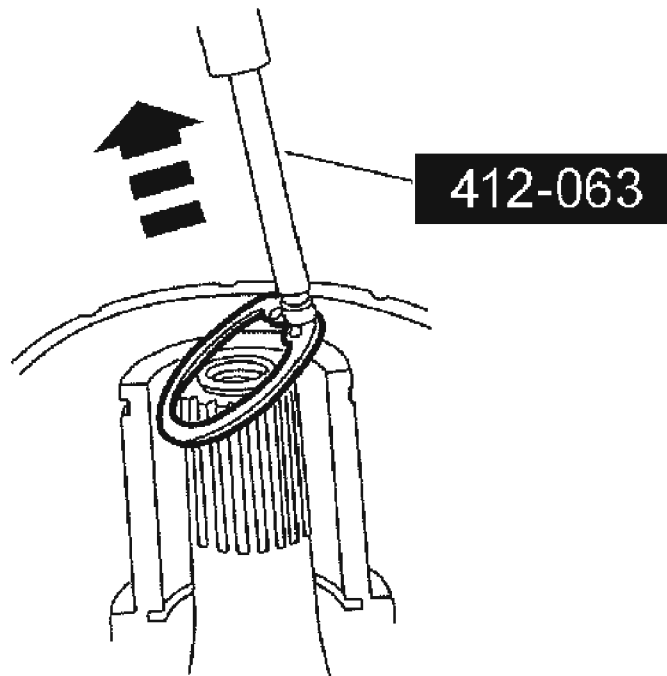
Rotating Special Tool To Position Tool Tip And Snap Ring Eye Closest To A/C Compressor Shaft
